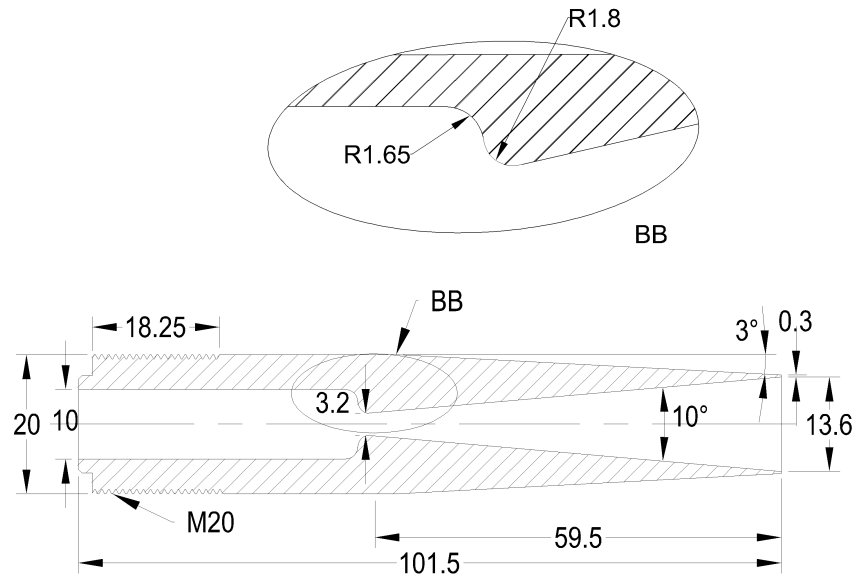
Profile of the primary nozzle with overall dimensions (all dimensions in mm).
